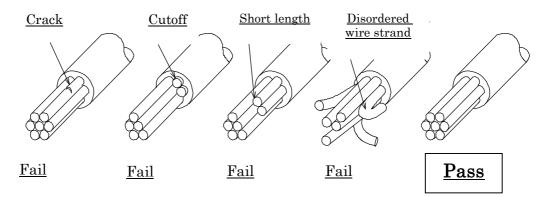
Defective wire treatment for crimpling.
